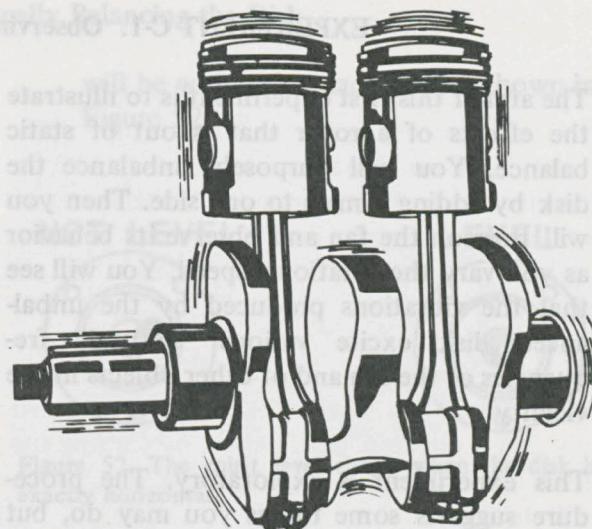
Forces from an improperly balanced crankshaft can quickly destroy the main engine bearing.
